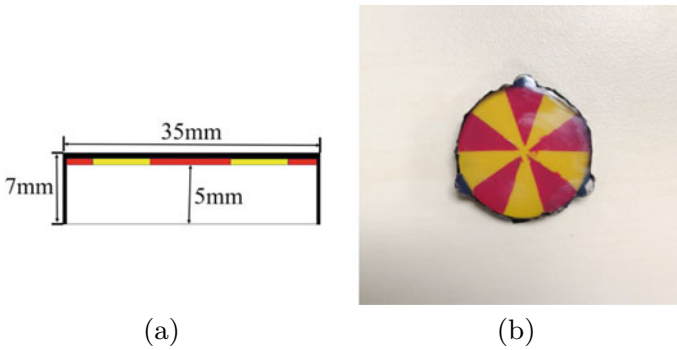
Side view of sensor structure (a) and the picture of real sensor (b)
